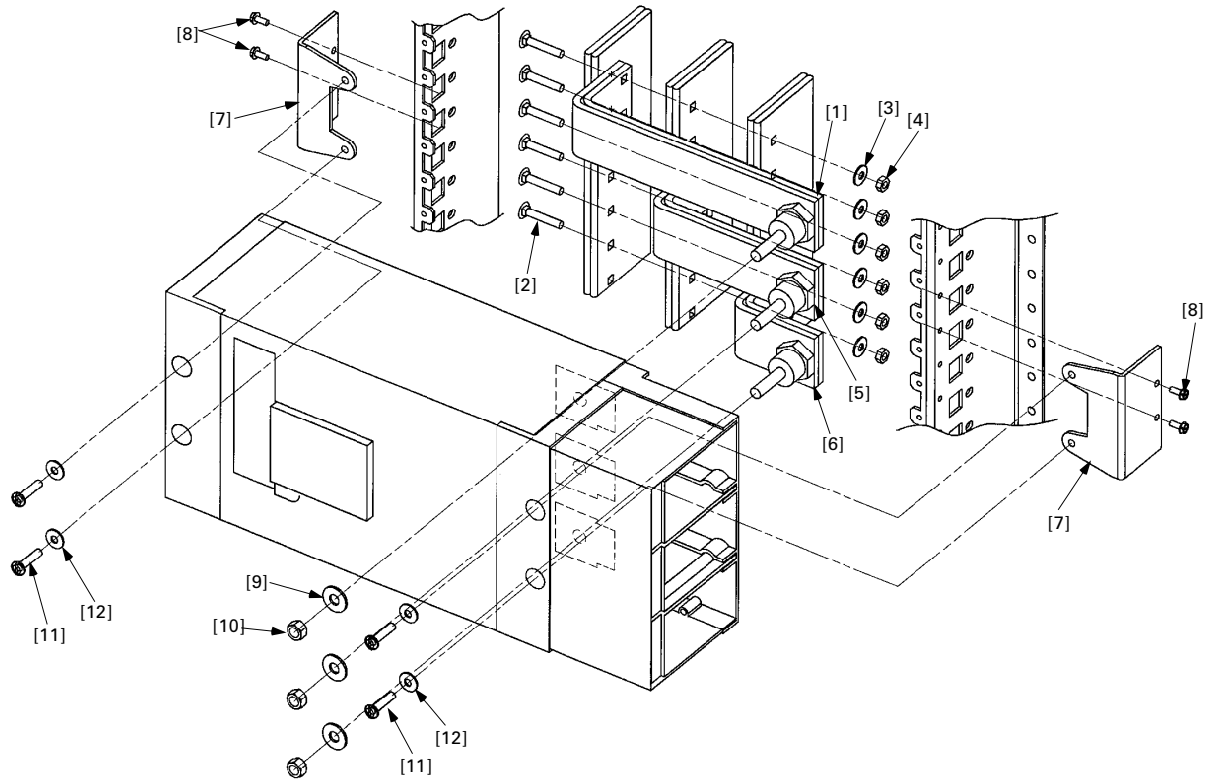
Mounting a K frame bolt-on circuit breaker, exploded assembly view.
